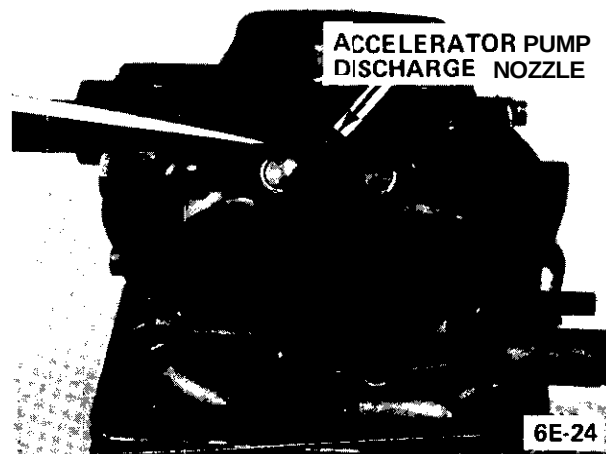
E-24 Removing Accelerator Pump Discharge Nozzle
